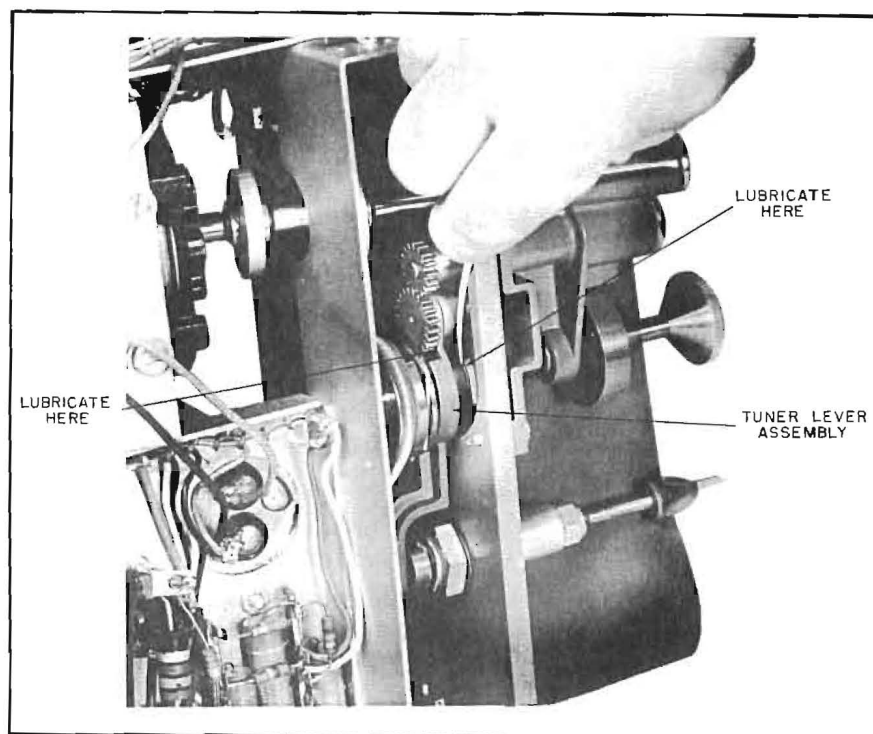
Oiling Bearing In 411073 Tuner Lever Assembly
